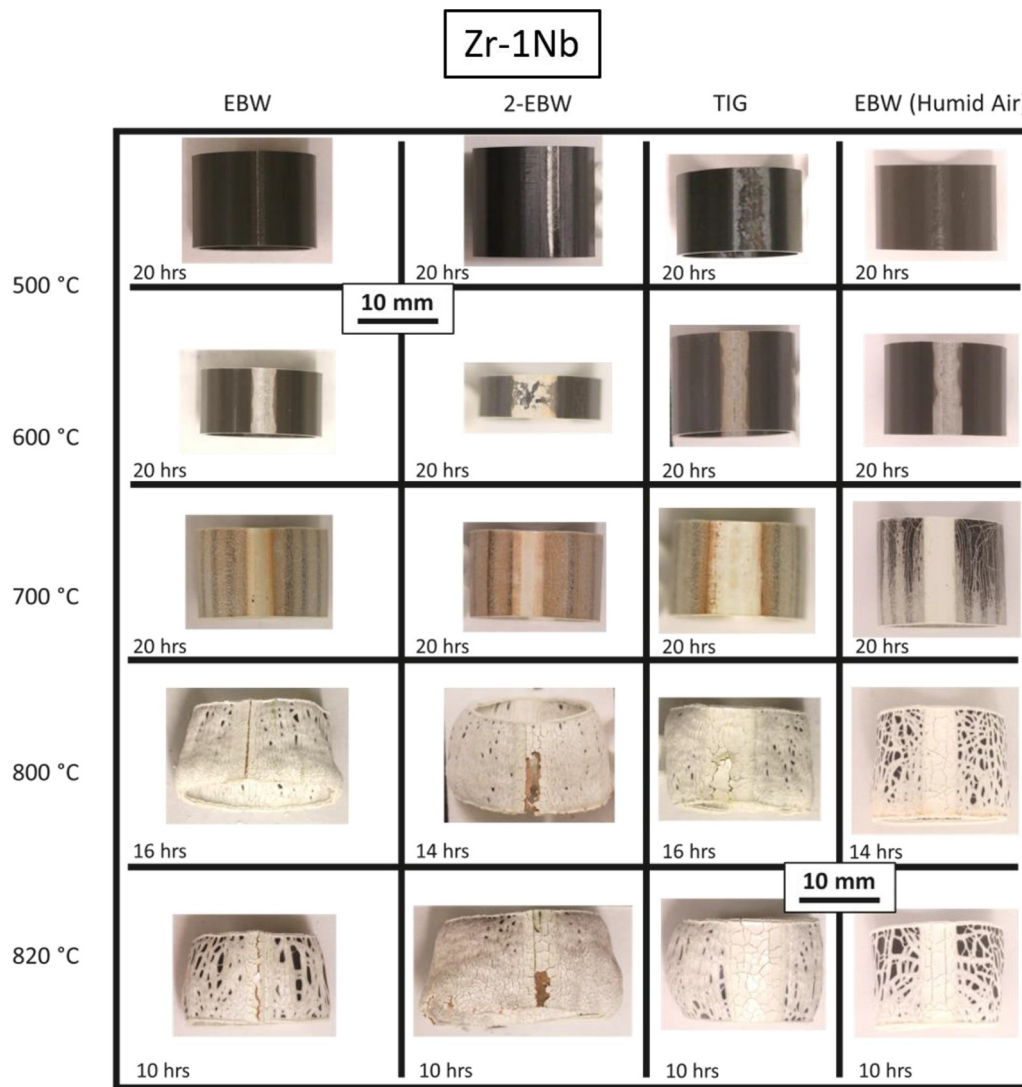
Macroscopic images of Zr-1Nb EBW or TIG welded tubes after isothermal oxidation experiments in dry or humid air with the weld facing forward.
